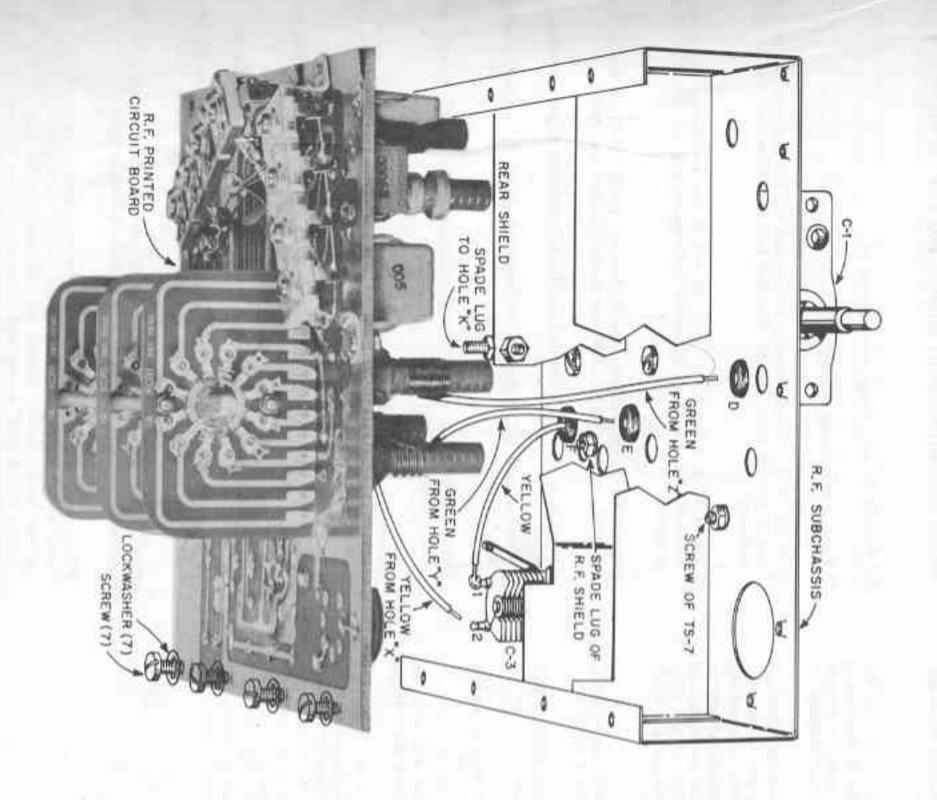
MOUNTING THE RF SUBCHASSIS
